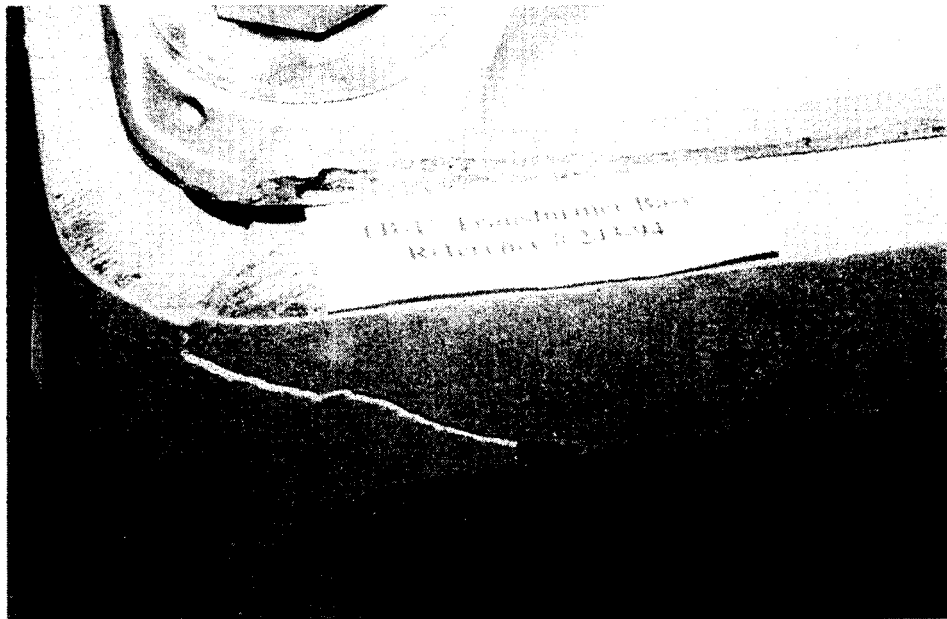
Cracked Transformer Base where Shoe Base Bolts on.
